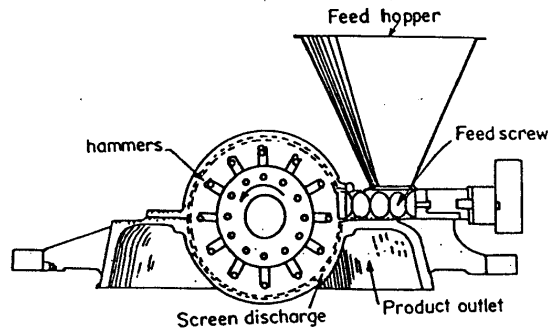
Hammer mill (Sahy and Singh, 1999).
